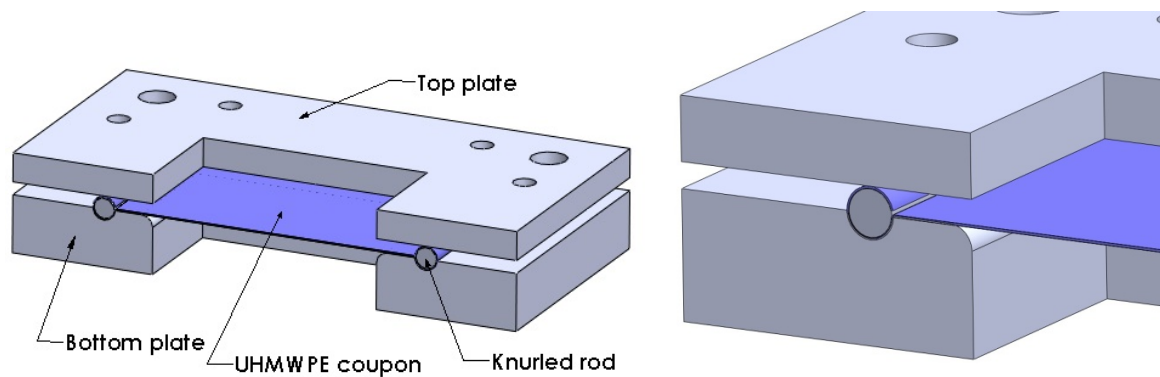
Sectioned view of test fixture with UHMWPE coupon. View on right is a blow-up of the sheet material and a knurled rod.
